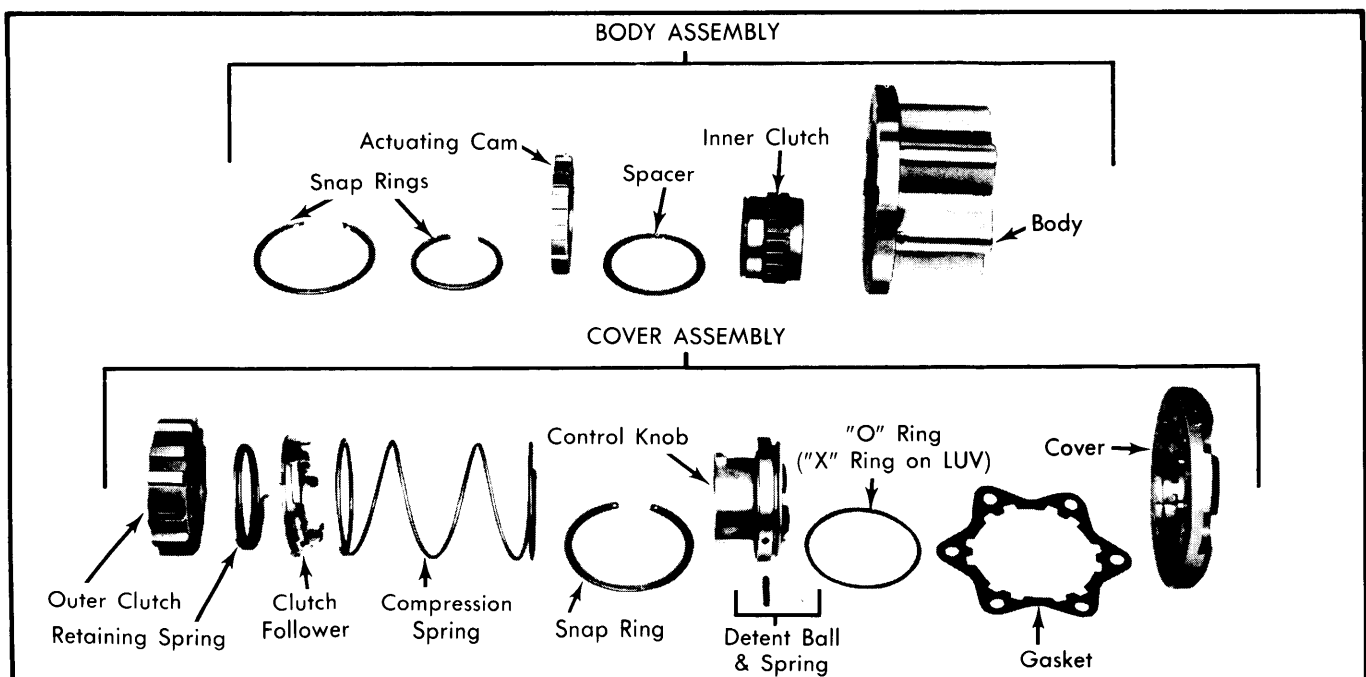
Exploded View of Toyota Locking Hub — LUV and Datsun Similar
